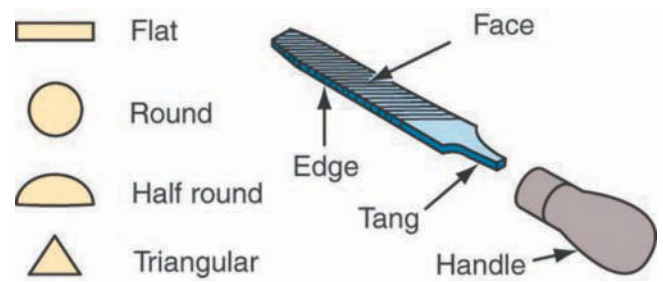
The parts of a file and the different edge shapes used by a power equipment engine technician.
